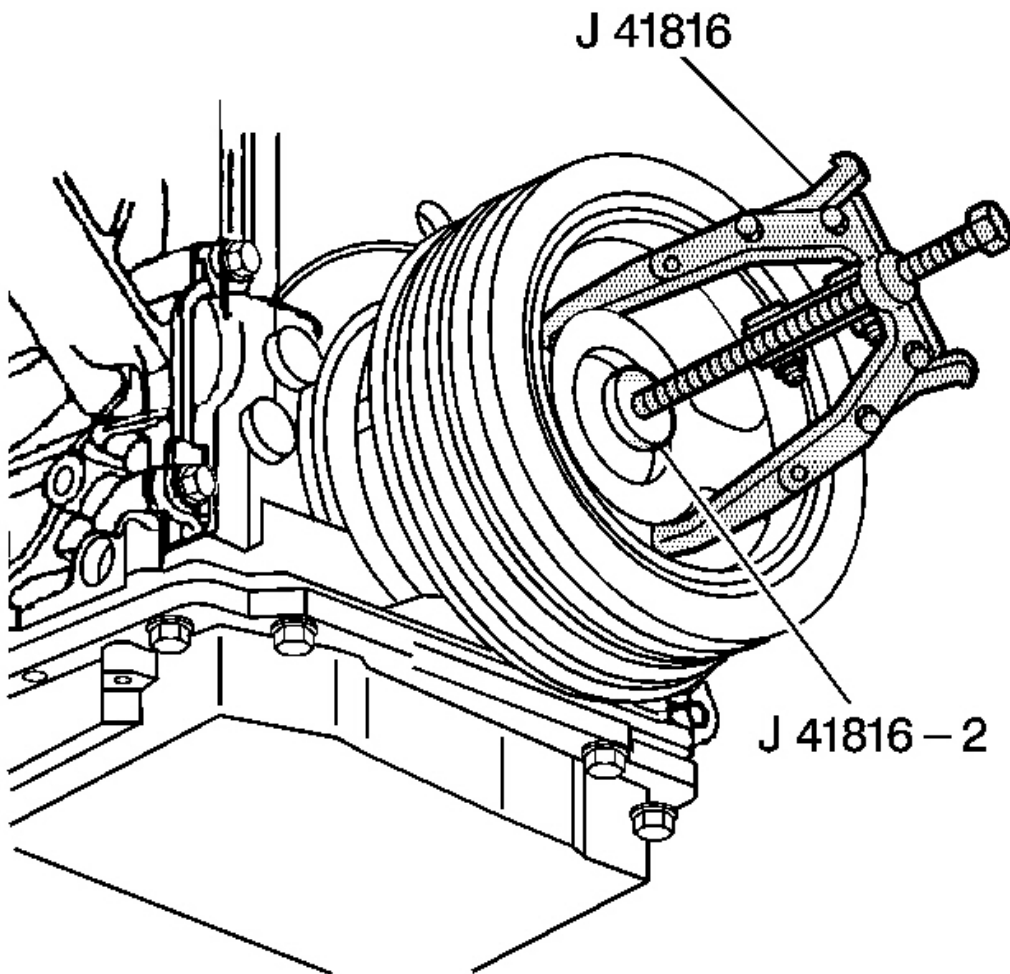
View Of Crankshaft Balancer, J 41816 & J 41816-2
